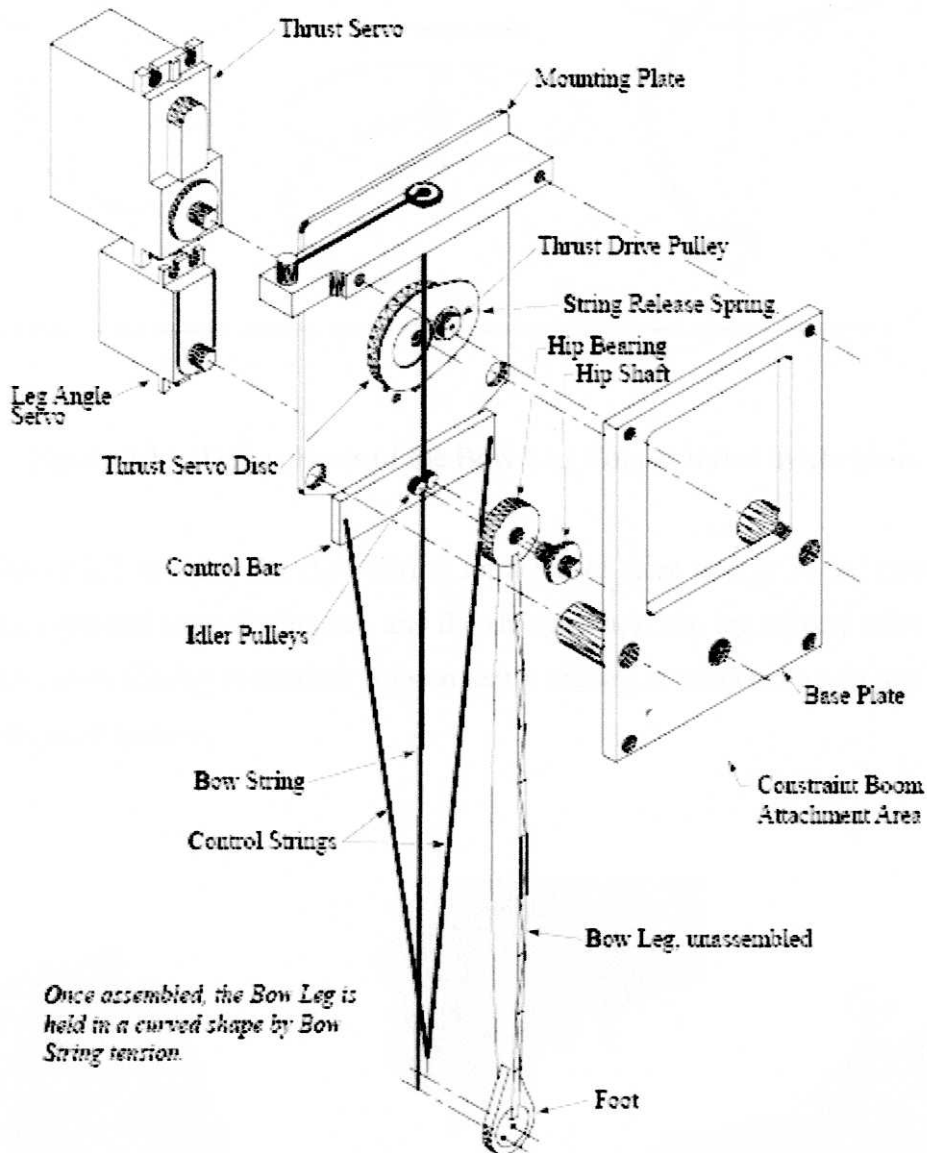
Exploded view of the Bow Leg Hopper.
